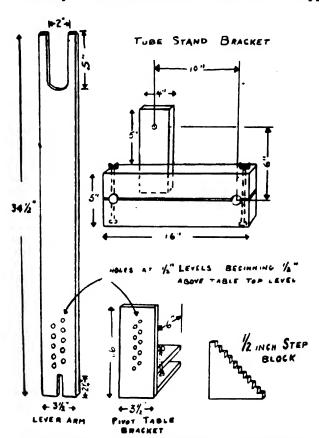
Scale drawing of tomographic wooden parts partially assembled.
